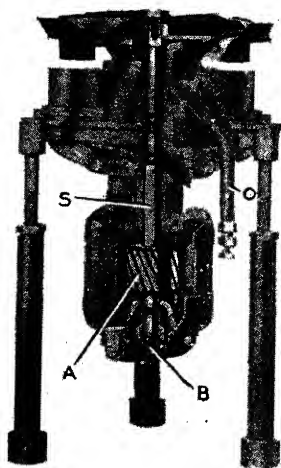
Typical shaft of vertical burner showing thrust bearing at bottom.
